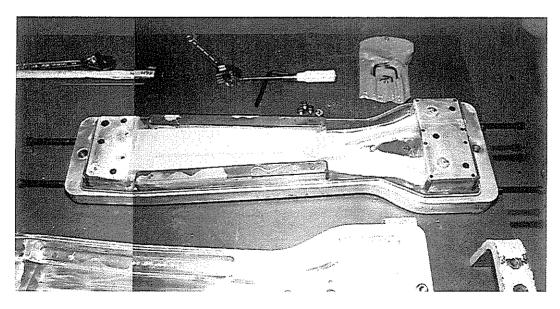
Sub-scale Manufacturing Test Specimen and mold
